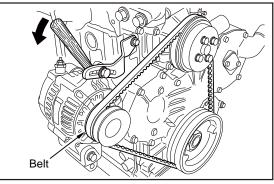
Belt and belt tension - Inspect and Adjust
